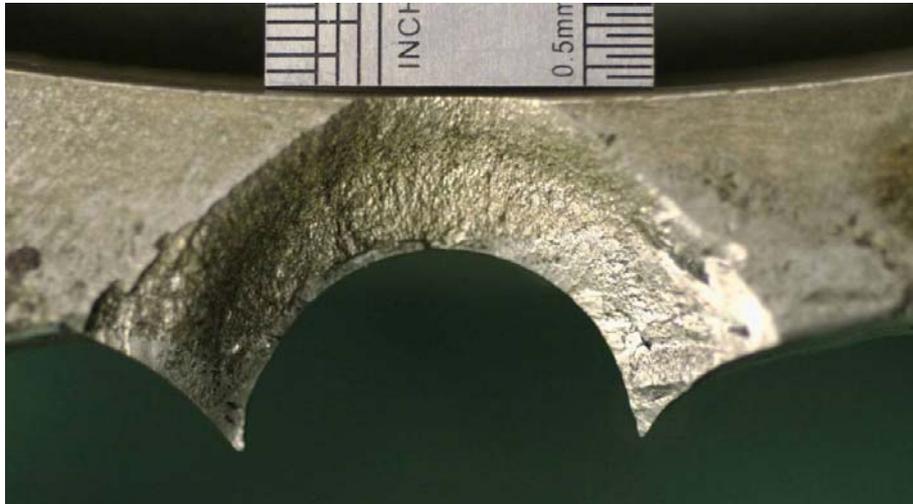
&b View of opposing fracture surfaces in lug 6.
